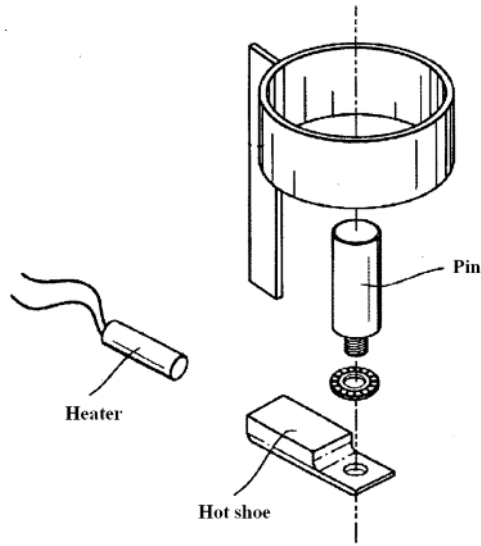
Friction stir welding tools for thermoplastics developed by Tracy Nelson et al. [26].
